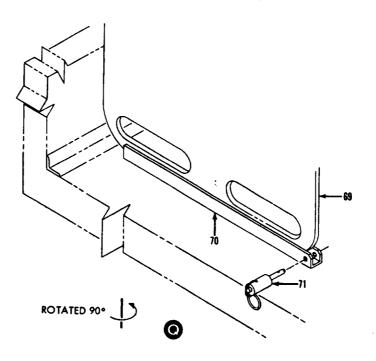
Equipment Installation (Sheet 6 of 25)
